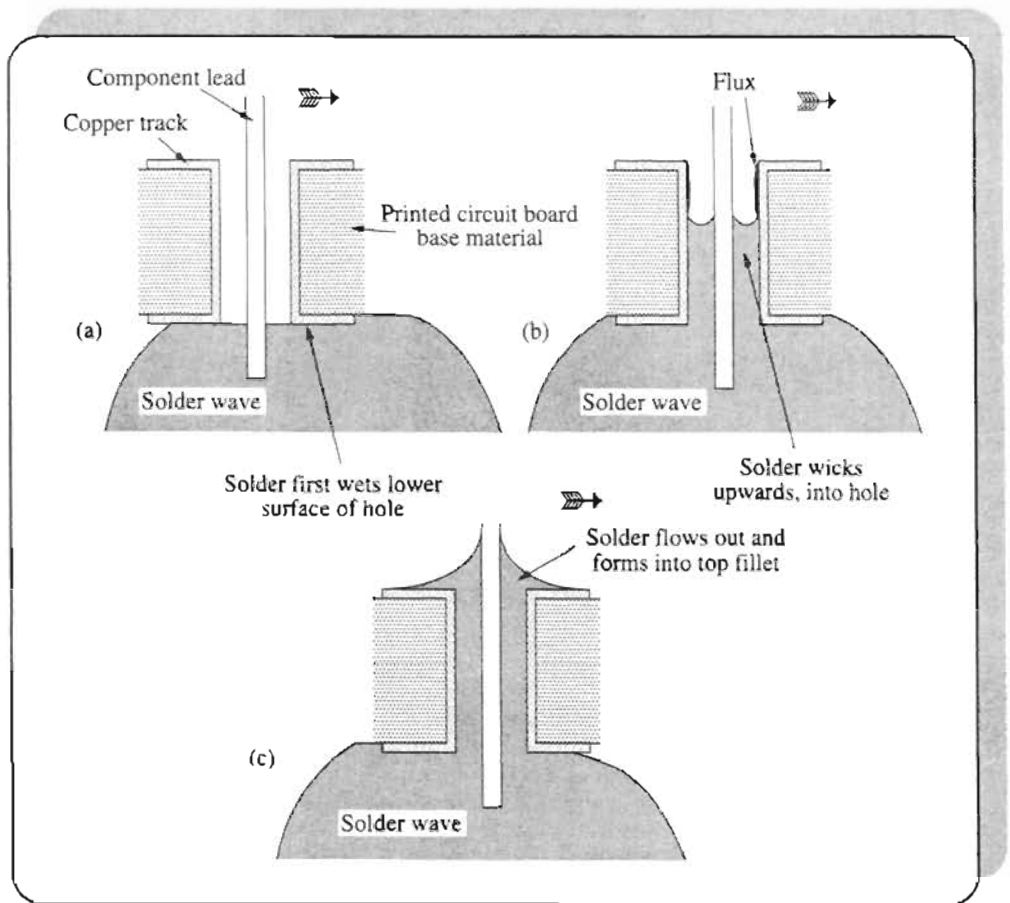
Stages in a CS soldering process, where (a) solder first wets the underside of a plated through-hole (b) solder wicks upward through the hole, pushing flux ahead of it (c) solder flows out of the top of the hole, to wet the top surface
